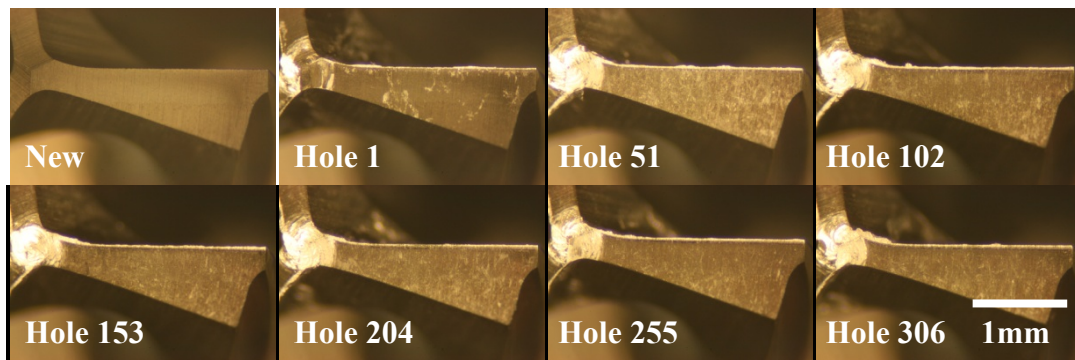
Tool wear micrographs of Graphit-iC™ drill under 70bar cutting fluid, 130m/min cutting speed (Test 9)
